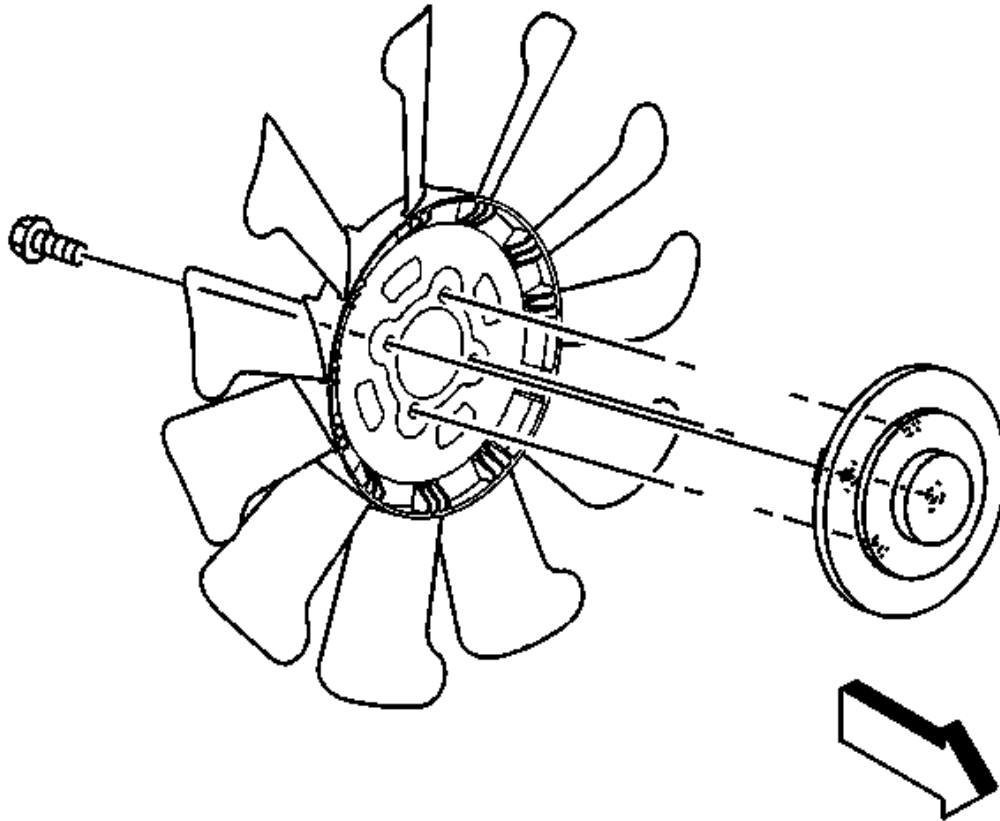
View Of Fan Clutch Hub & Nut
